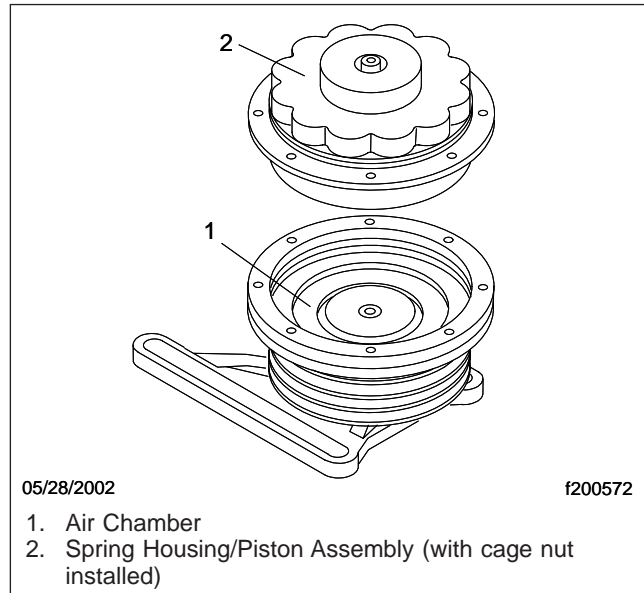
, Spring Housing/Piston Assembly Removal and Installation
